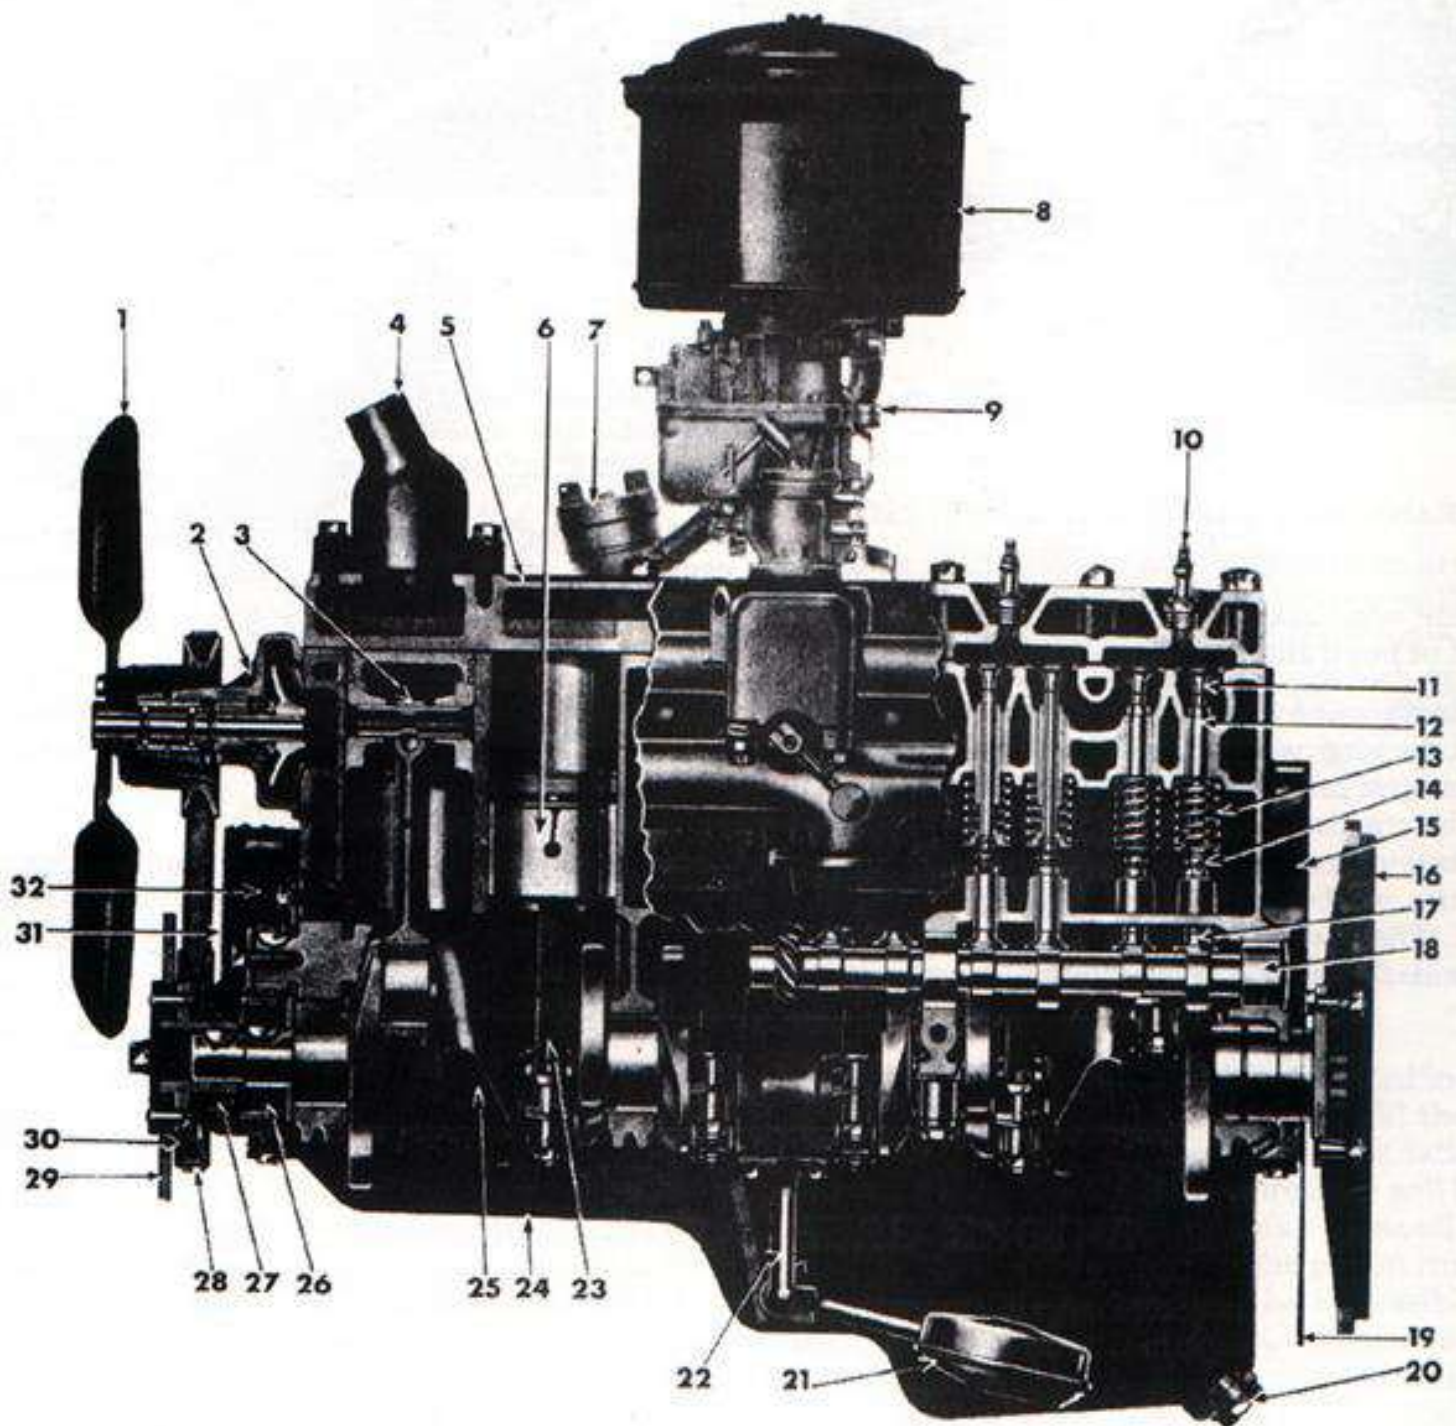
SIX CYLINDER L-HEAD ENGINE—SIDE VIEW
